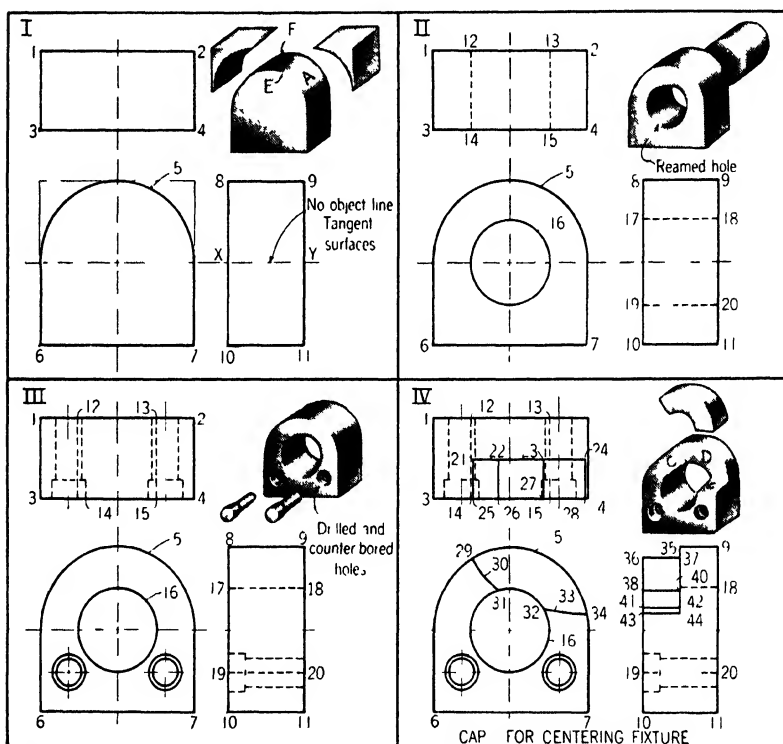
MACHINING A “CAP” — CYLINDRICAL SURFACES
